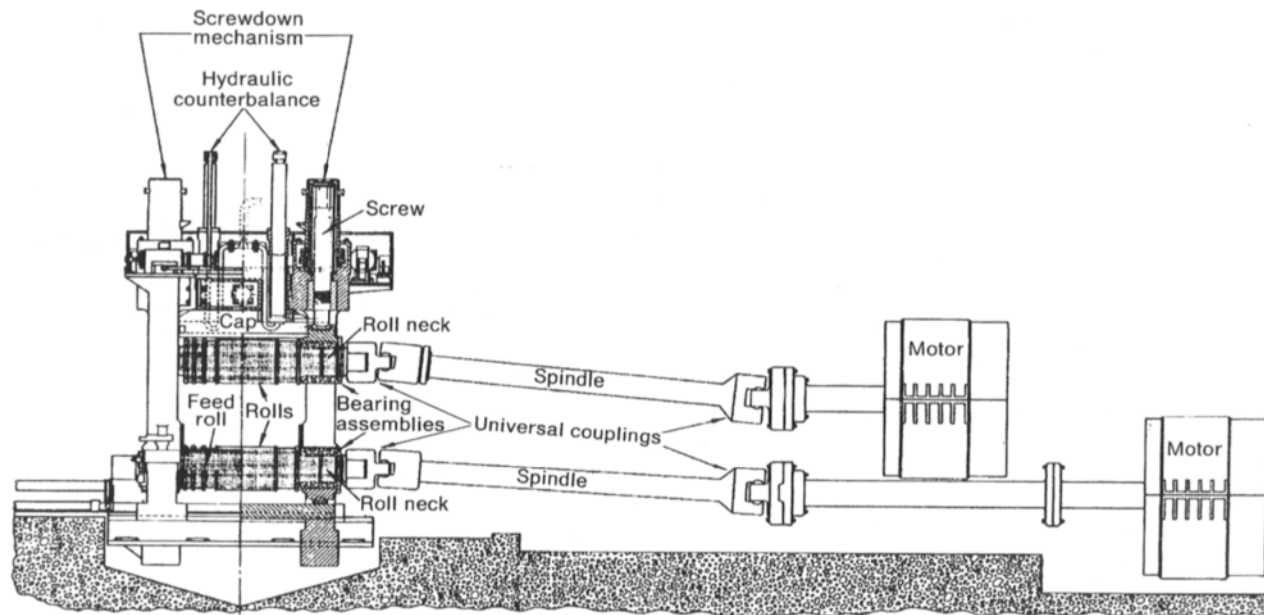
General arrangement of typical reversing two-high breakdown mill. (Reproduced courtesy of The AISE Steel Foundation.)
